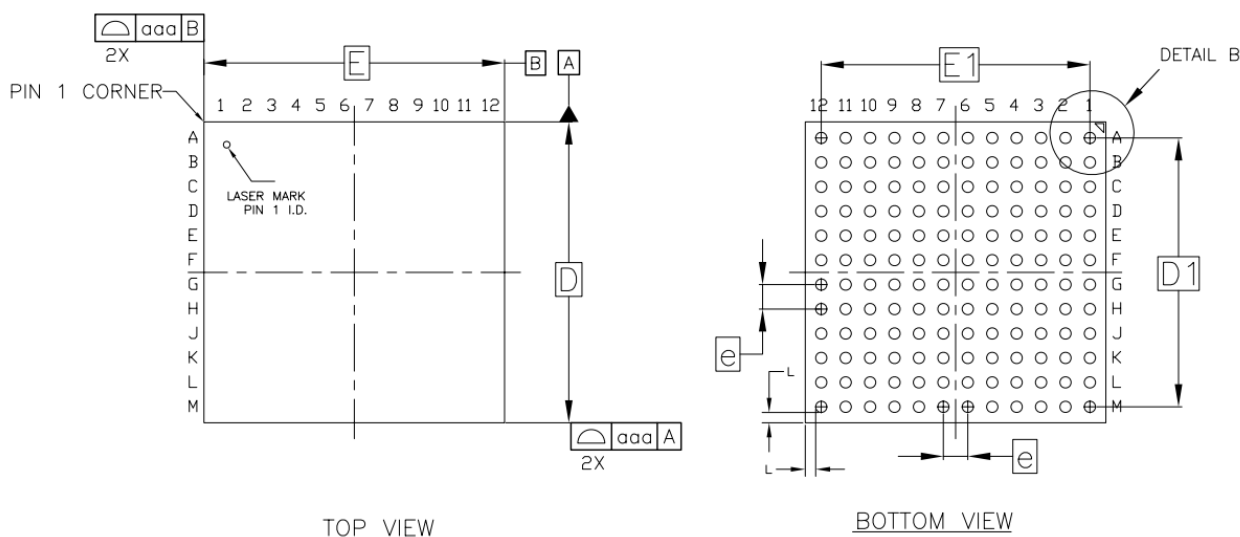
RK628E WBBGA144 Package Top View and bottom View
